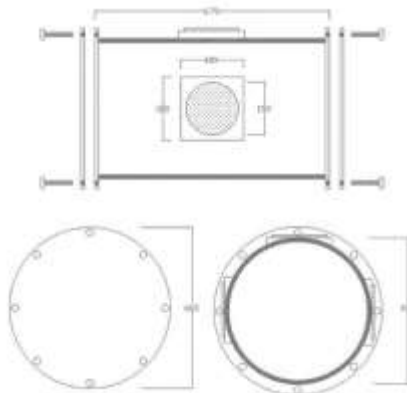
Sketch of bomb shell, flanges and windows sketch
